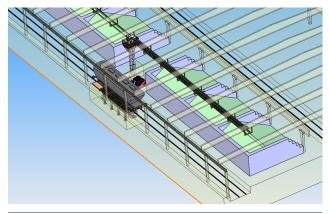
Horizontal shuttle box conveyor and wagon discharge pit installed at Cemagro, Finland.
